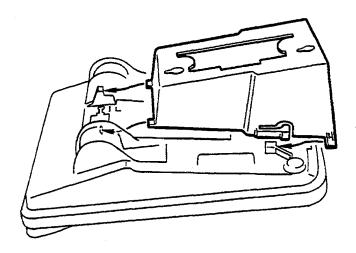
Mount Multiline Terminal to WMU-W (BK)/(SW) Unit
